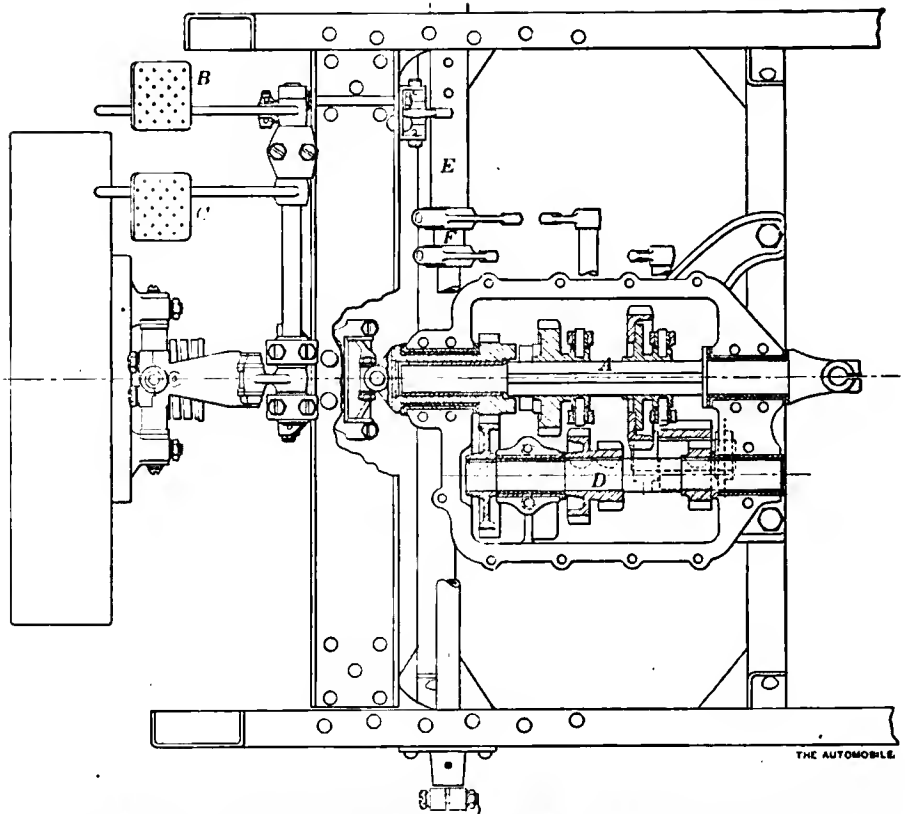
COLUMBIA SLIDING GEAR TRANSMISSION SYSTEM, SHOWN IN SECTION FROM ABOVE WITH COVER REMOVED.
